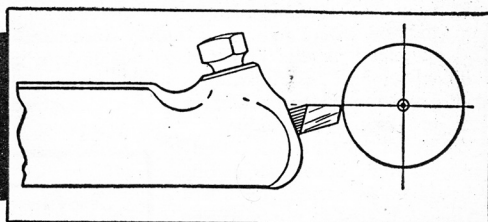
Cutting edge is on center for thread cutting, taper turning, machining brass, copper, etc.
